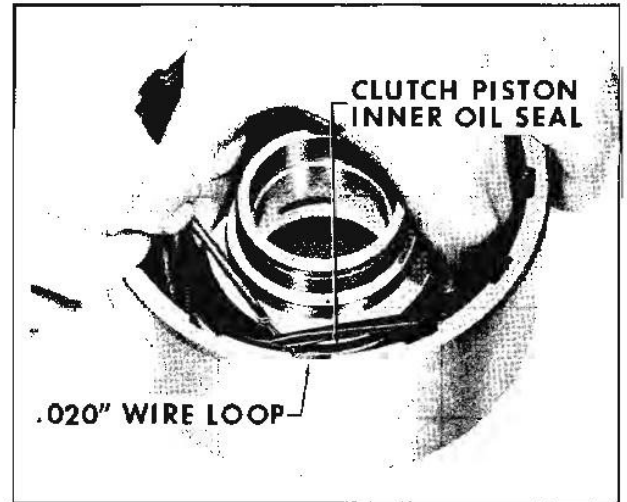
B-80 Installing Clutch Piston Inner Oil Seal
